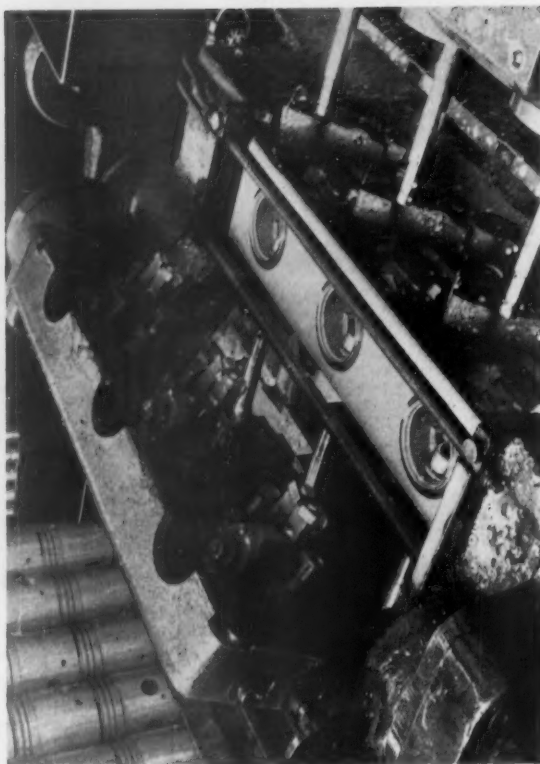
The work-holding fixture on the fine boring machine for gudgeon pin holes
